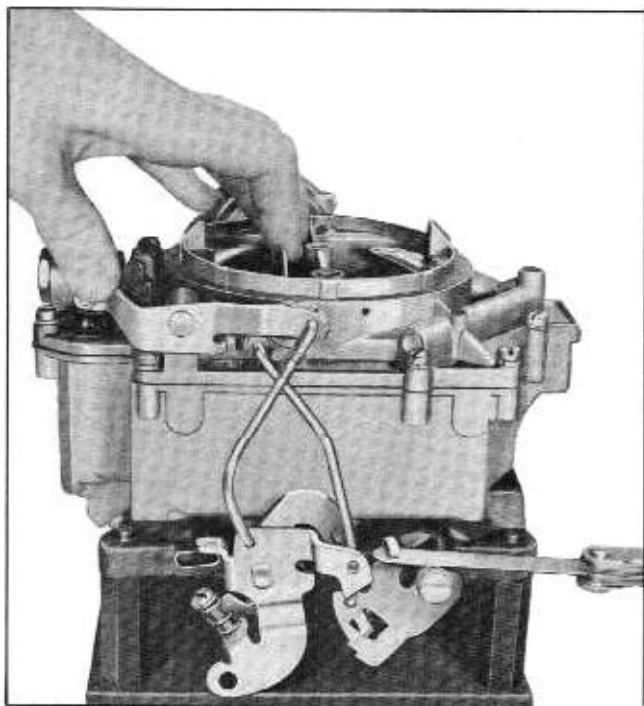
B-103 Checking Secondary Throttle Contour Clearance
